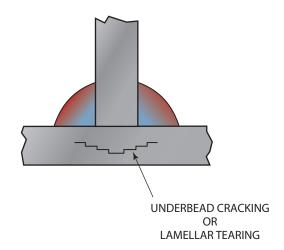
Underbead cracking or lamellar tearing of the base plate.
